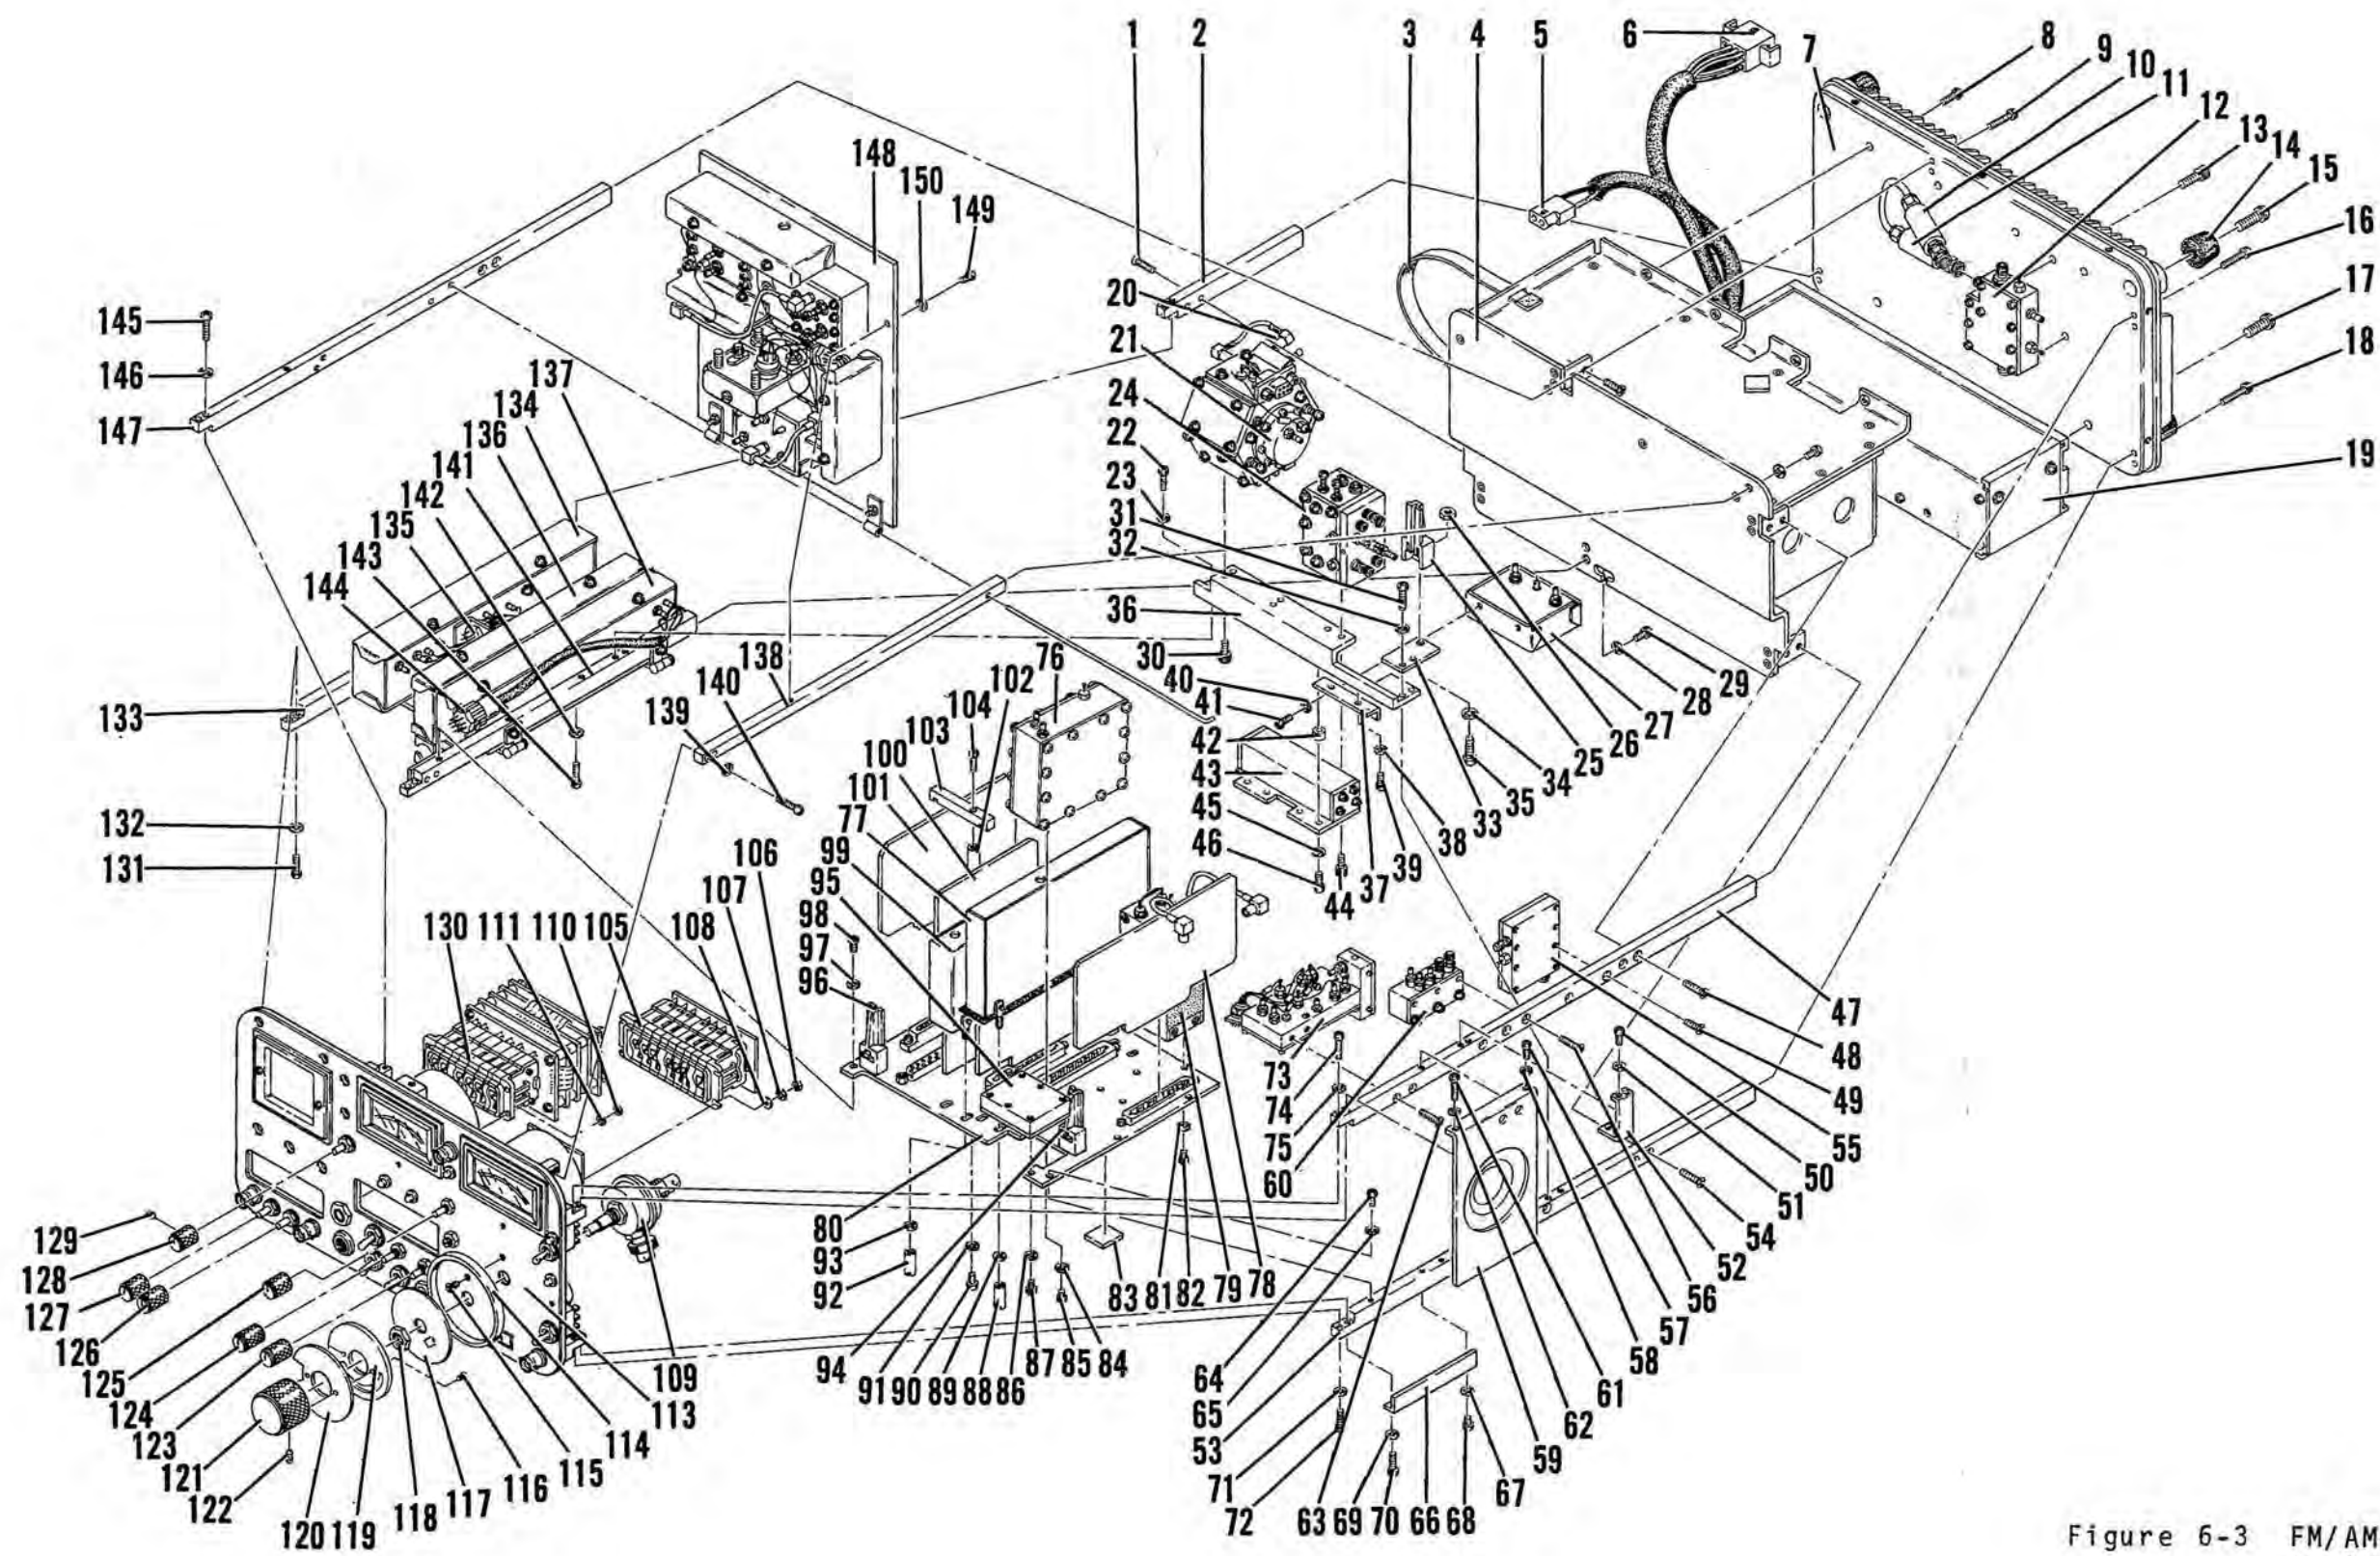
FM/AM-1100S/A Composite Disassembly and Reassembly
